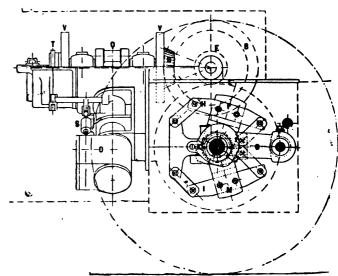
DIAGRAMMATIC VIEW OF ENGINE.
